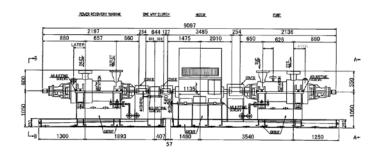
Atypical layout of HPRT coupled to a motor driven feed pump in a typical hydro processing unit.
